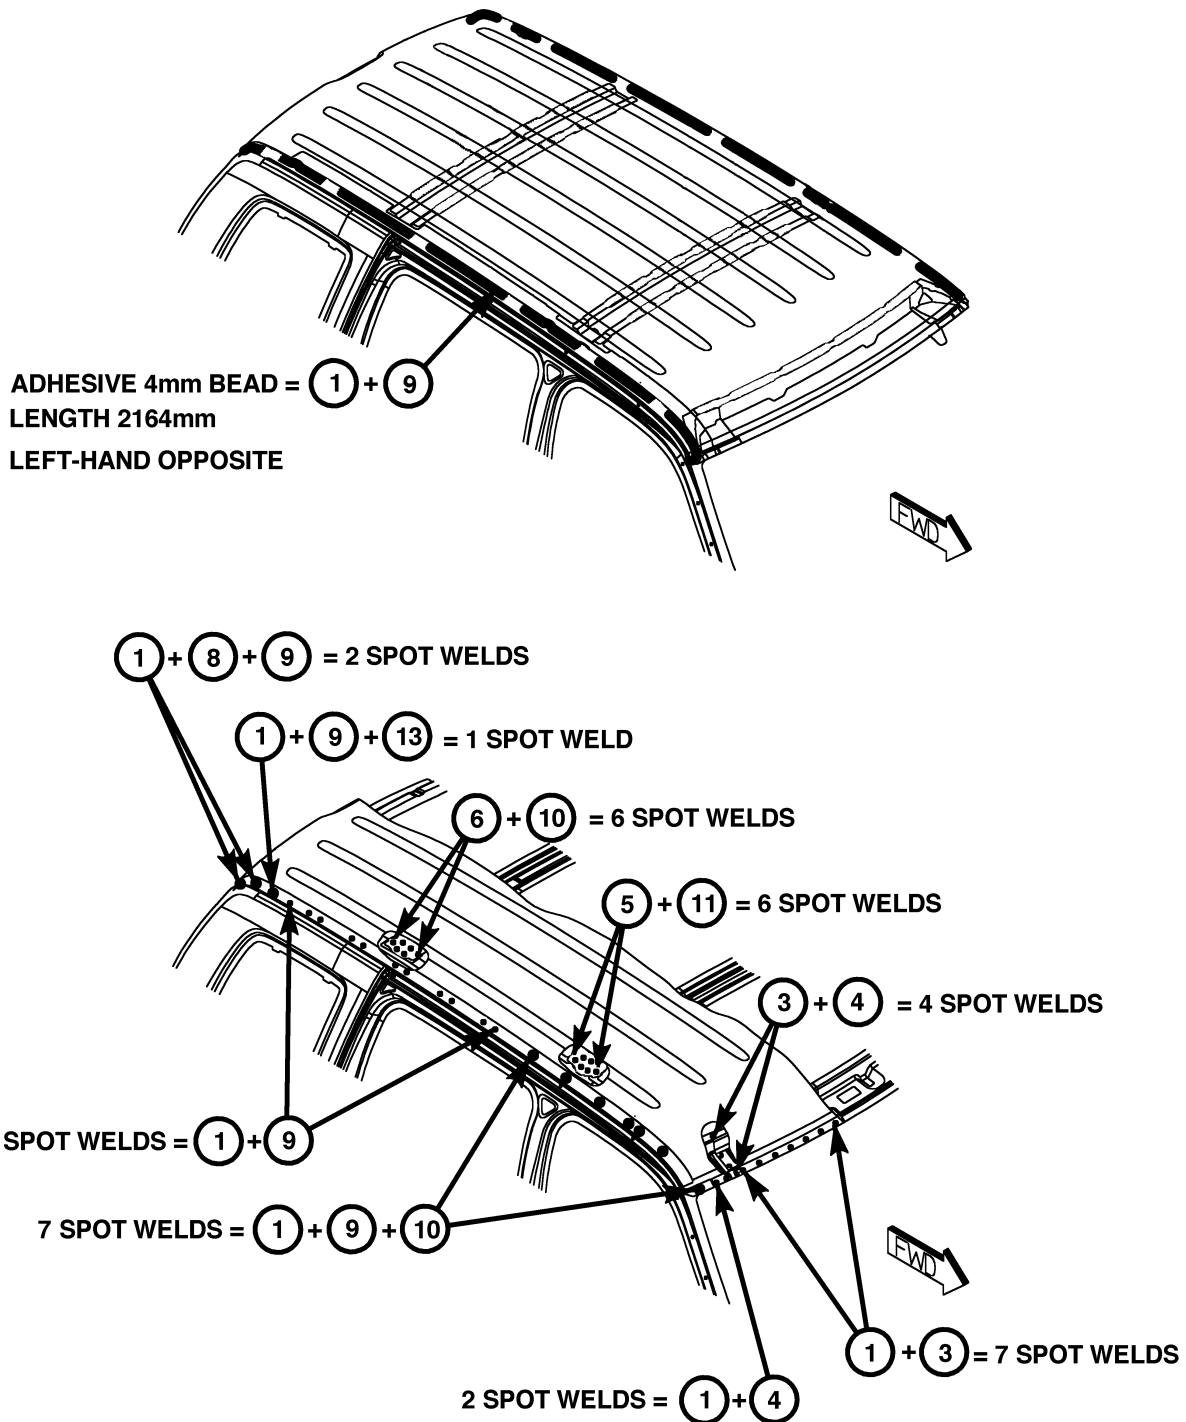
ROOF PANEL AND BODY SIDE WELD AND ADHESIVE LOCATIONS
